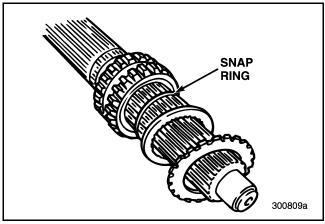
Installing Internal-Toothed and External-Toothed Thrust Washers
